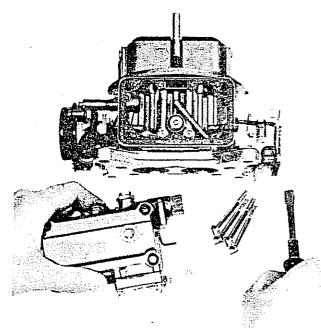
REMOVAL OR INSTALLATION OF PRIMARY FUEL BOWL
